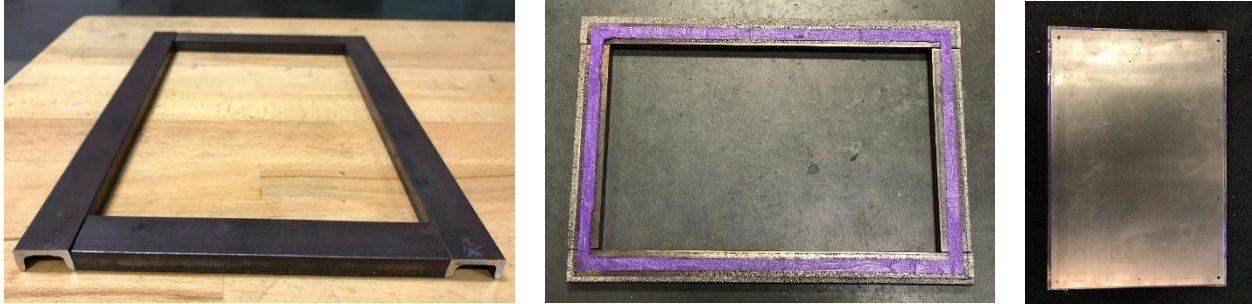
(a) Steel frame; (b) adhesive applied on the frame; (c) aluminum flat panel mounted on the frame
